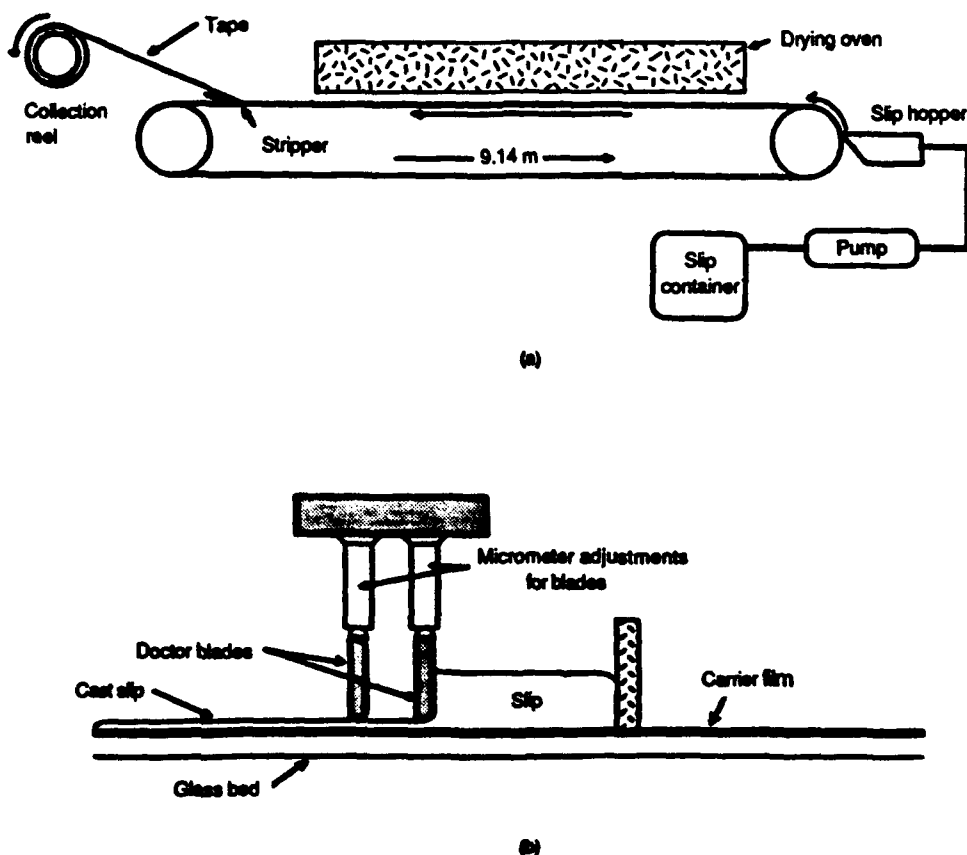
Schematic of methods for MLC manufacturing; (a) belt casting; (b) carrier film casting using a doctor blade.
